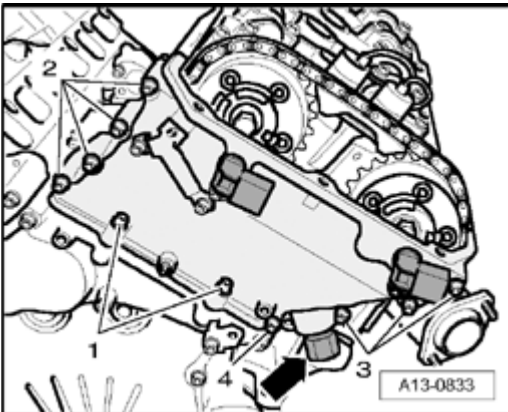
Camshaft Timing Chain Tensioner & Bolts
